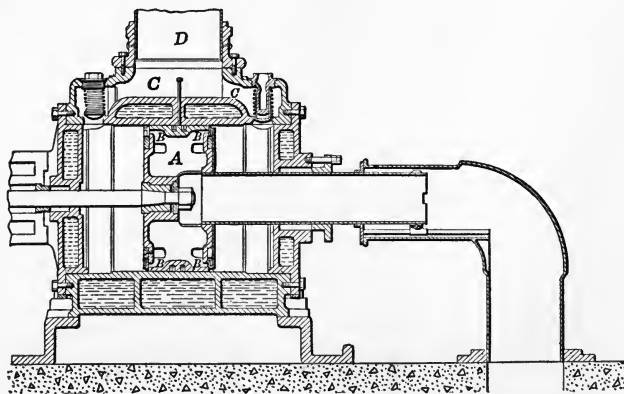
Enlarged section of L. P. air cylinder of Ingersoll-Rand compressor.
